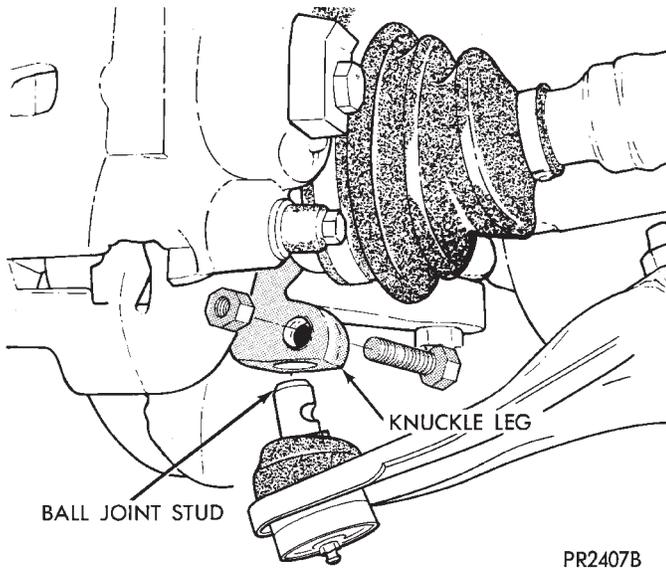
Install Knuckle Assembly on Ball Joint Stud
